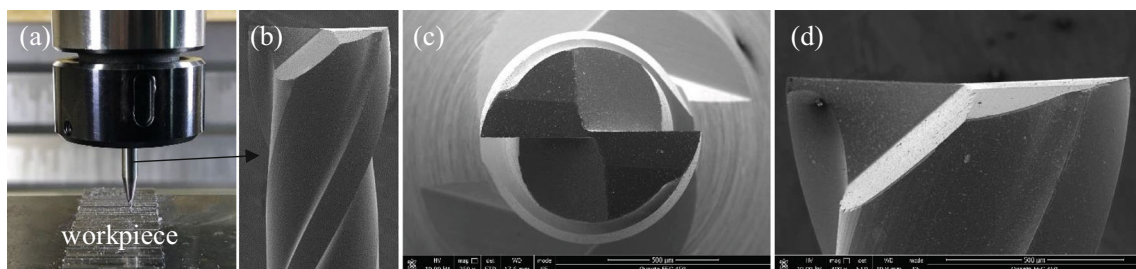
The experimental setup and tool morphology. a Experimental setup. b Macro view of the micromilling tool. c Top view of the micromilling tool. d Side view of the micromilling tool
